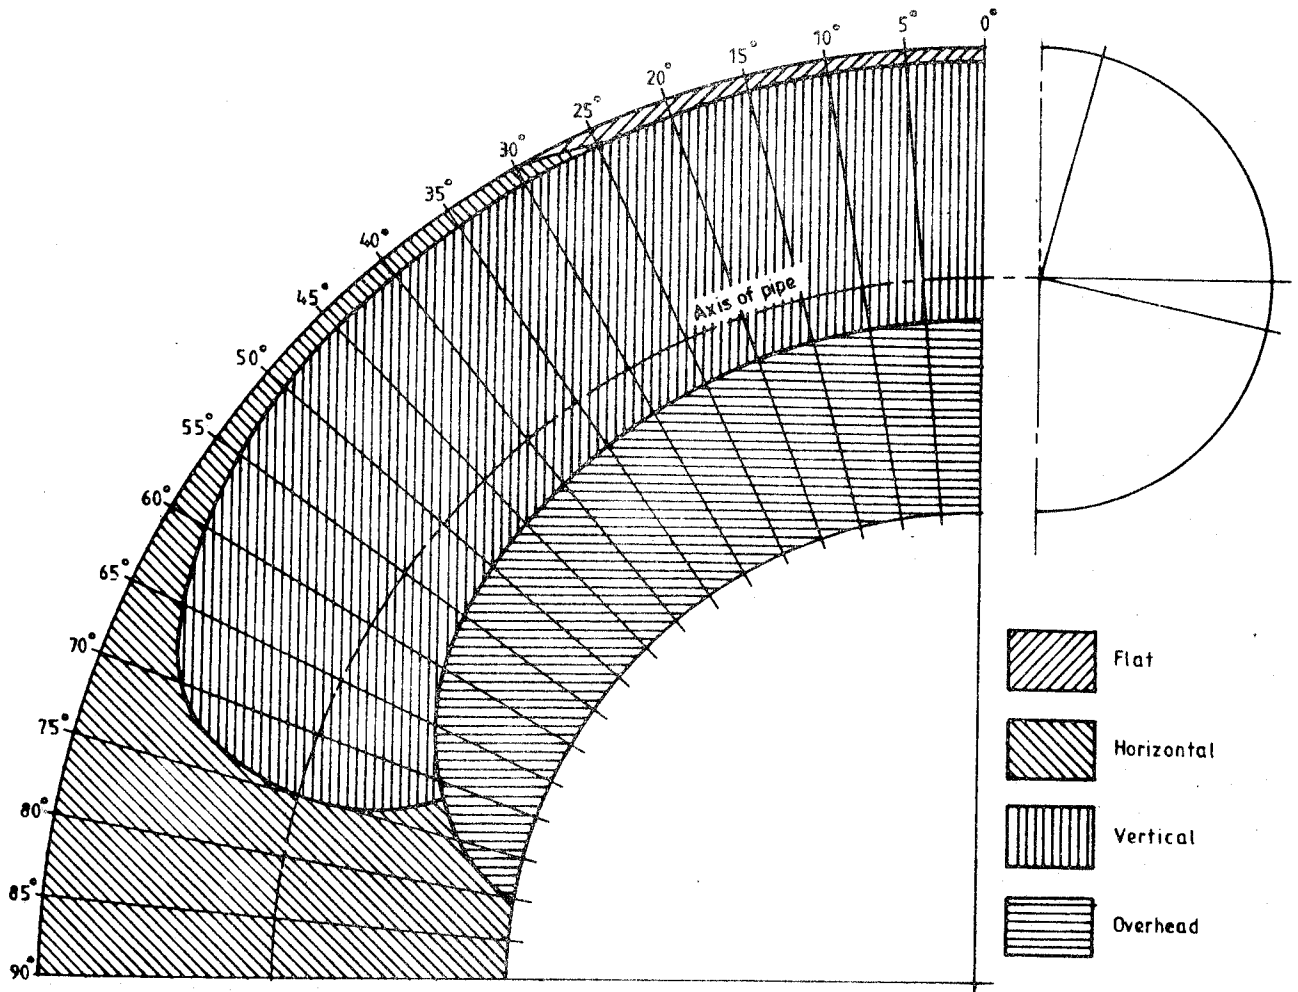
Orientation of weld positions of pipe welds in space
